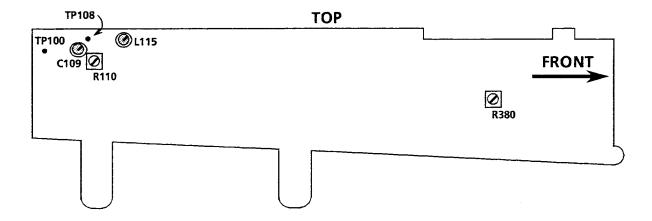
Z-Axis circuit board (A4) adjustment and test point locations
